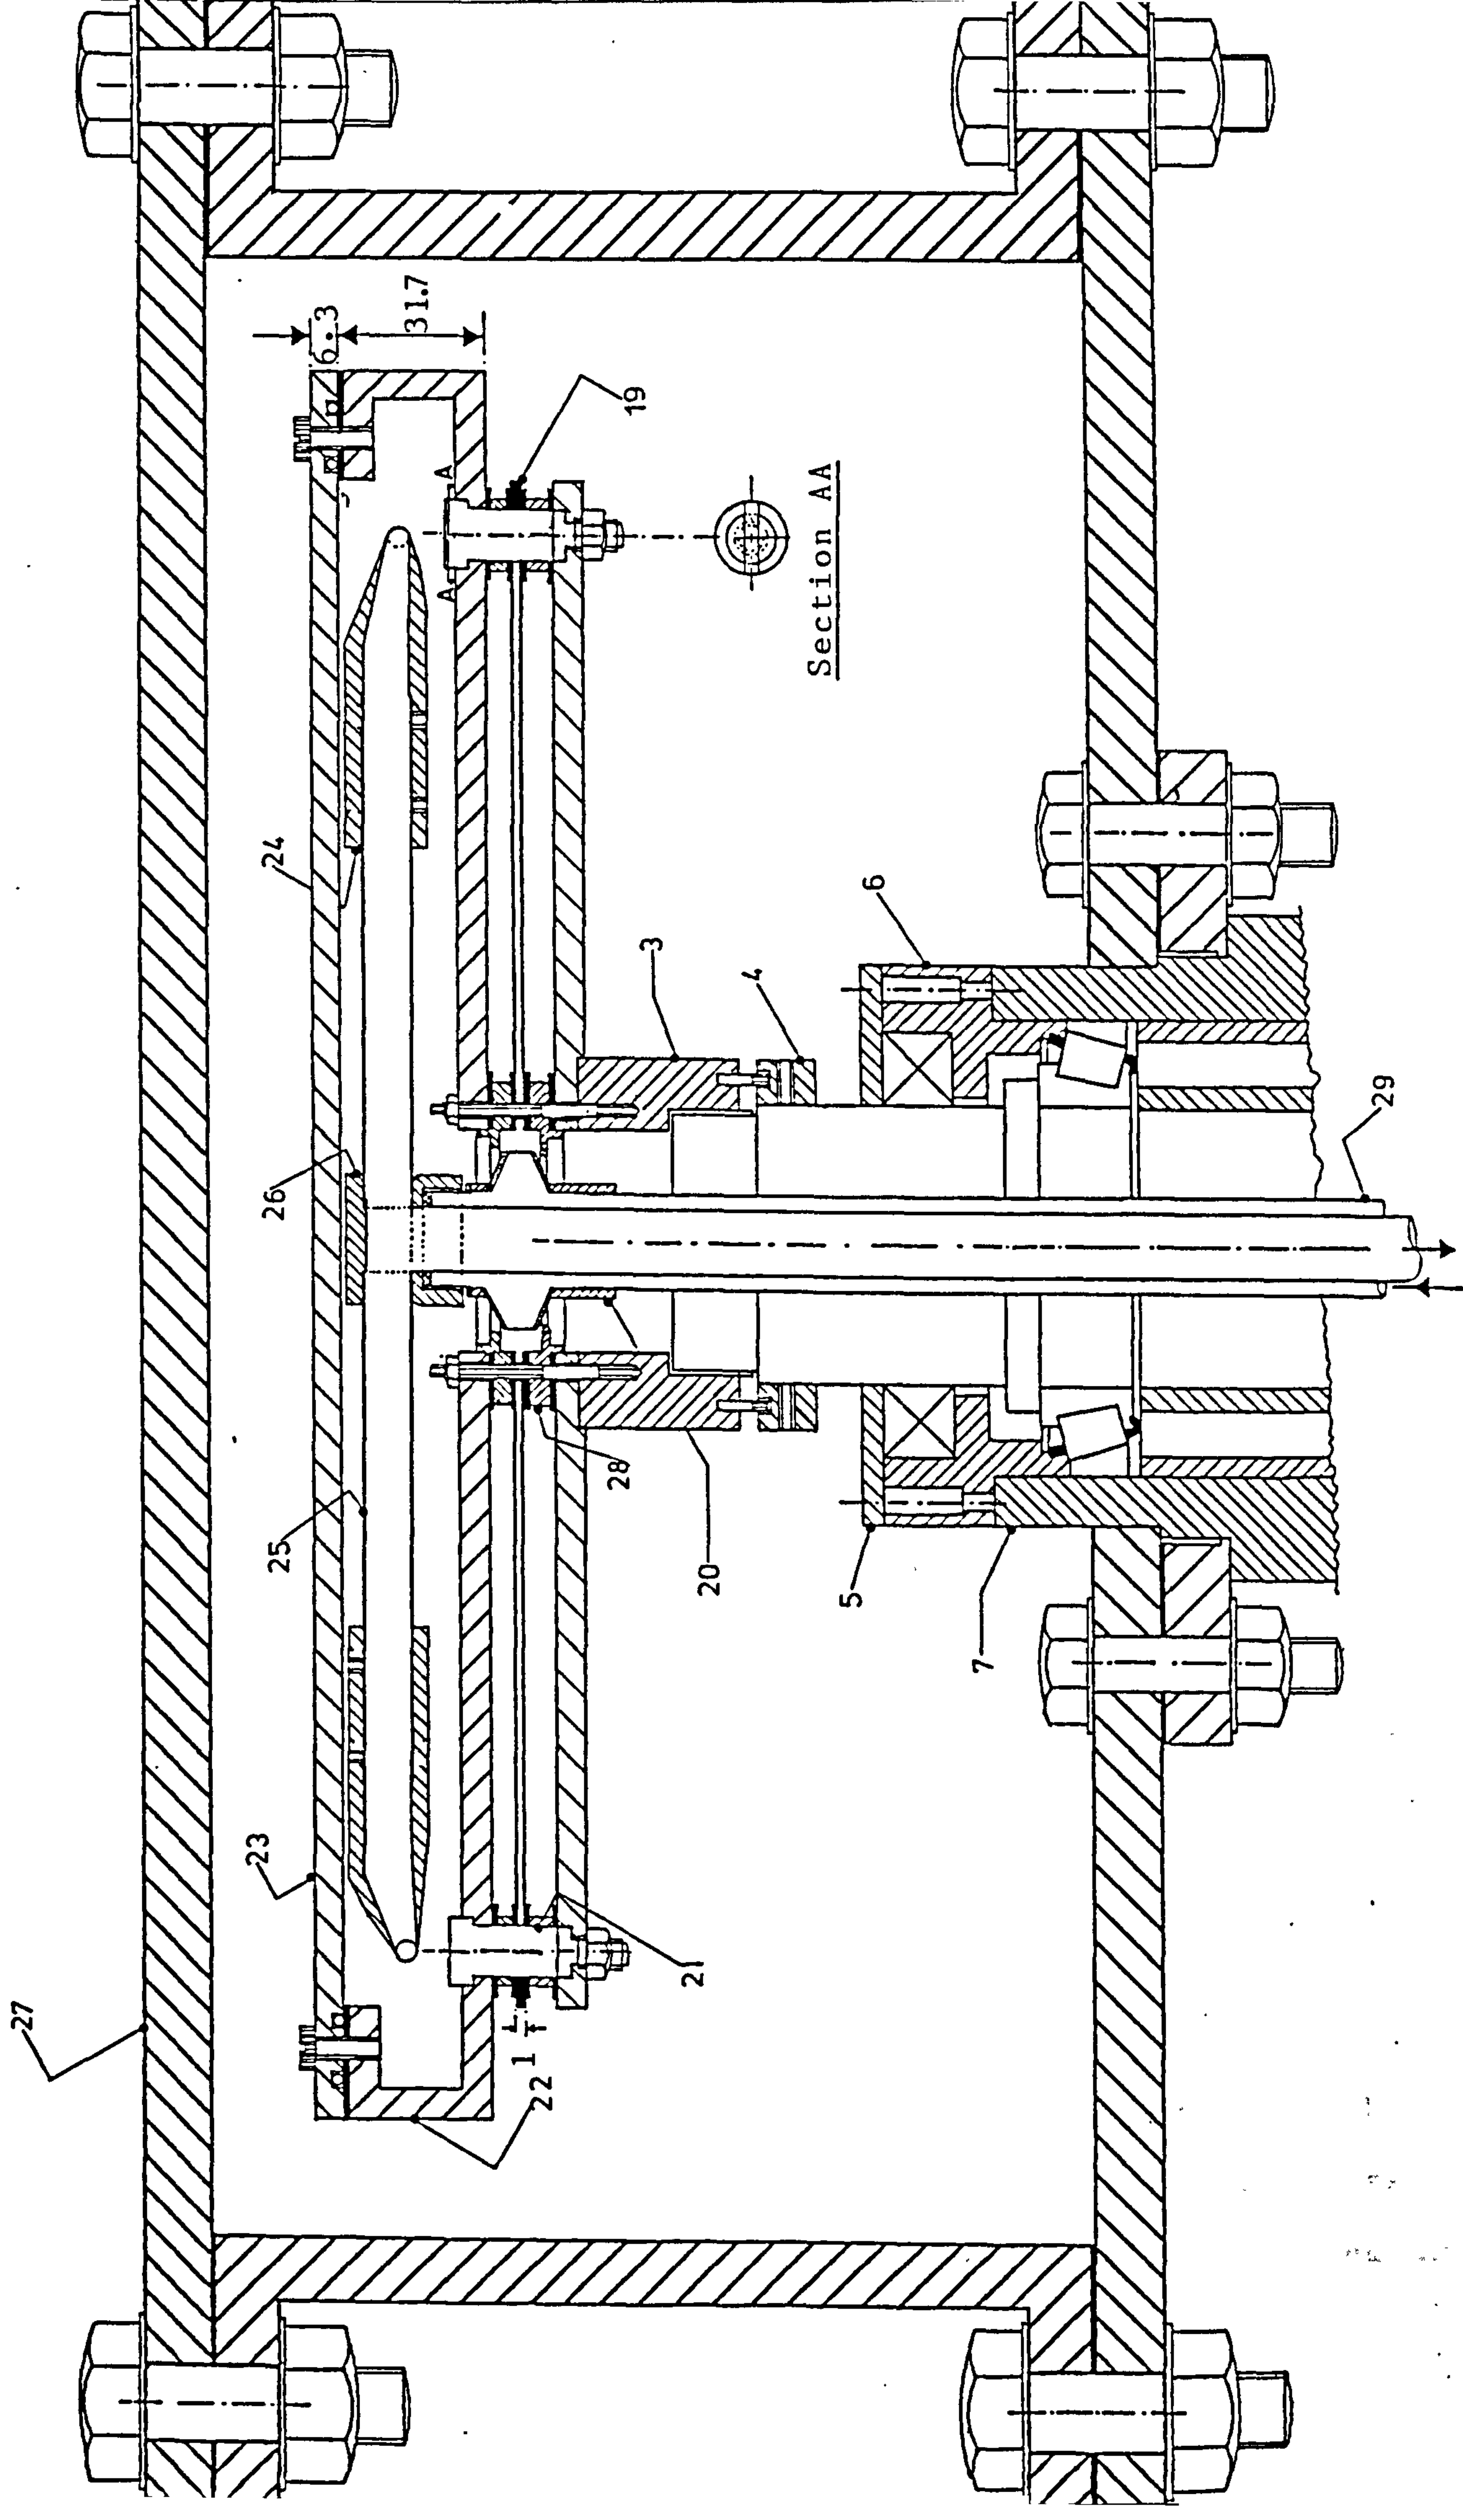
CROSS-SECTIONAL VIEW OF THE DISC ASSEMBLY
